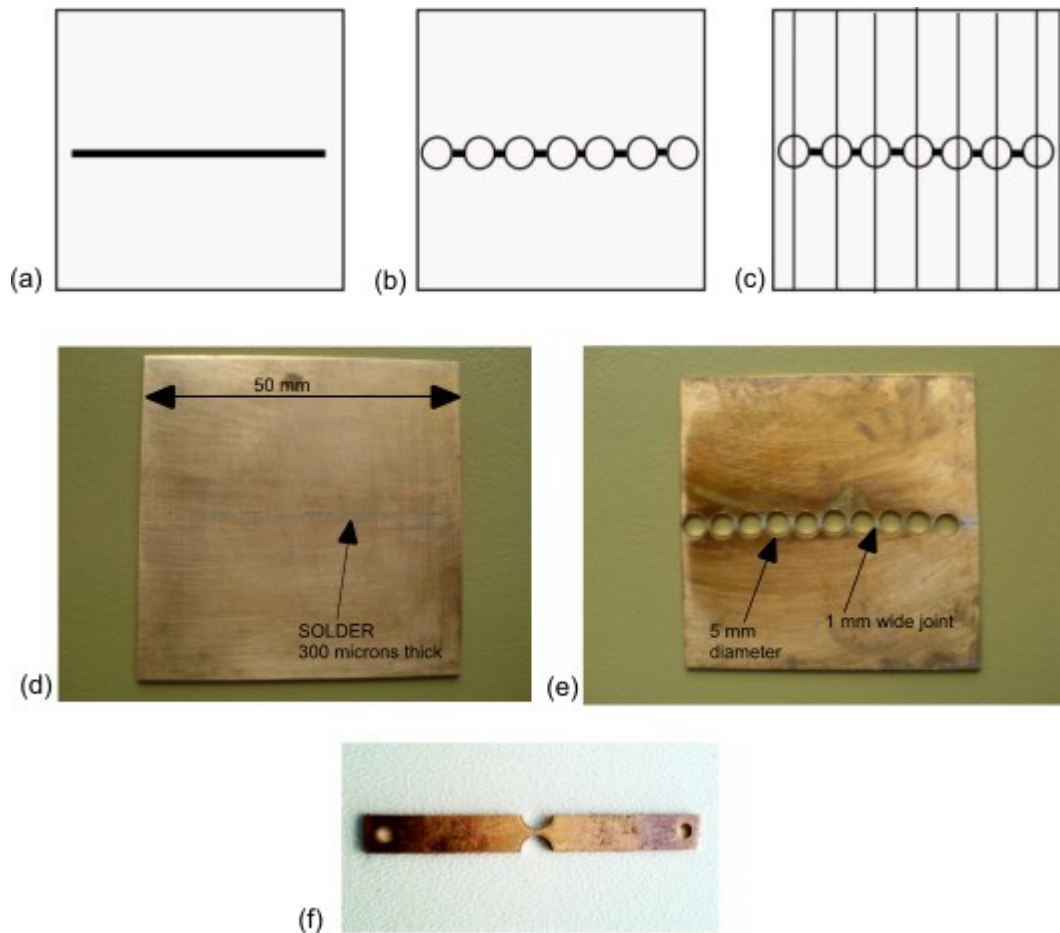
Schematics showing sample preparation (a) The alloy is soldered in the slot. (b) A row of holes is punched. (c) Samples are cut. (d) Photo of the copper plate showing the solder slot. (e) Photo of the solder plate showing the row of holes. (f) Photo of a finished sample.
